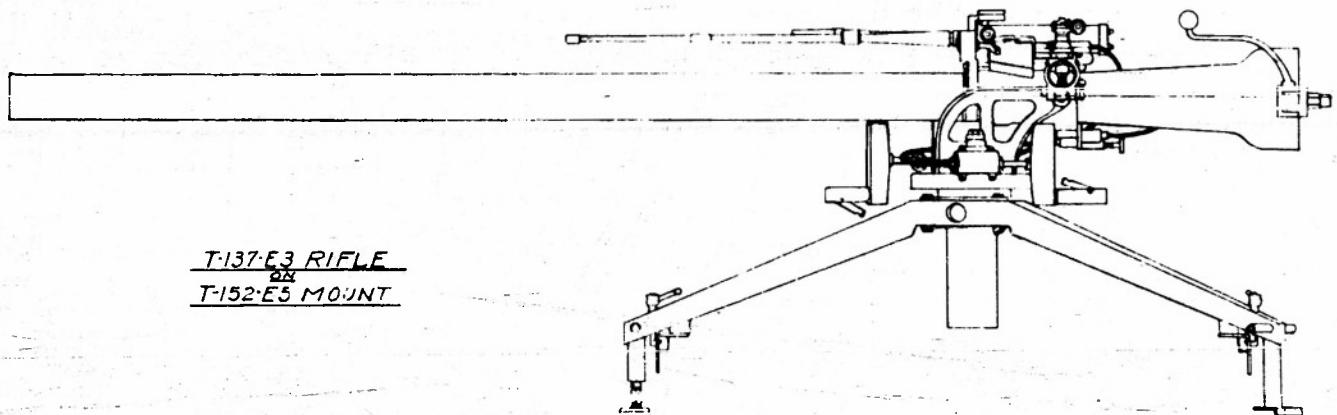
Assembly of T137E3 Rifle and T152E5 Mount.
